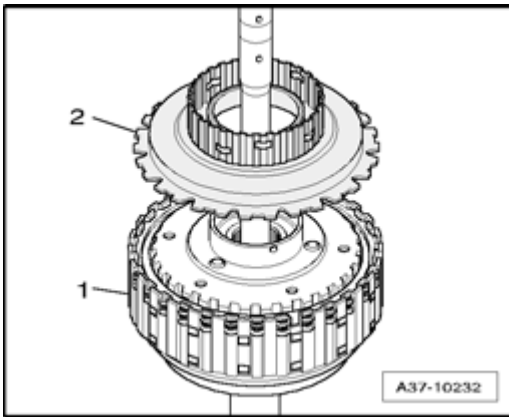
Inner Plate Carrier "C" And Clutch "A/B"
